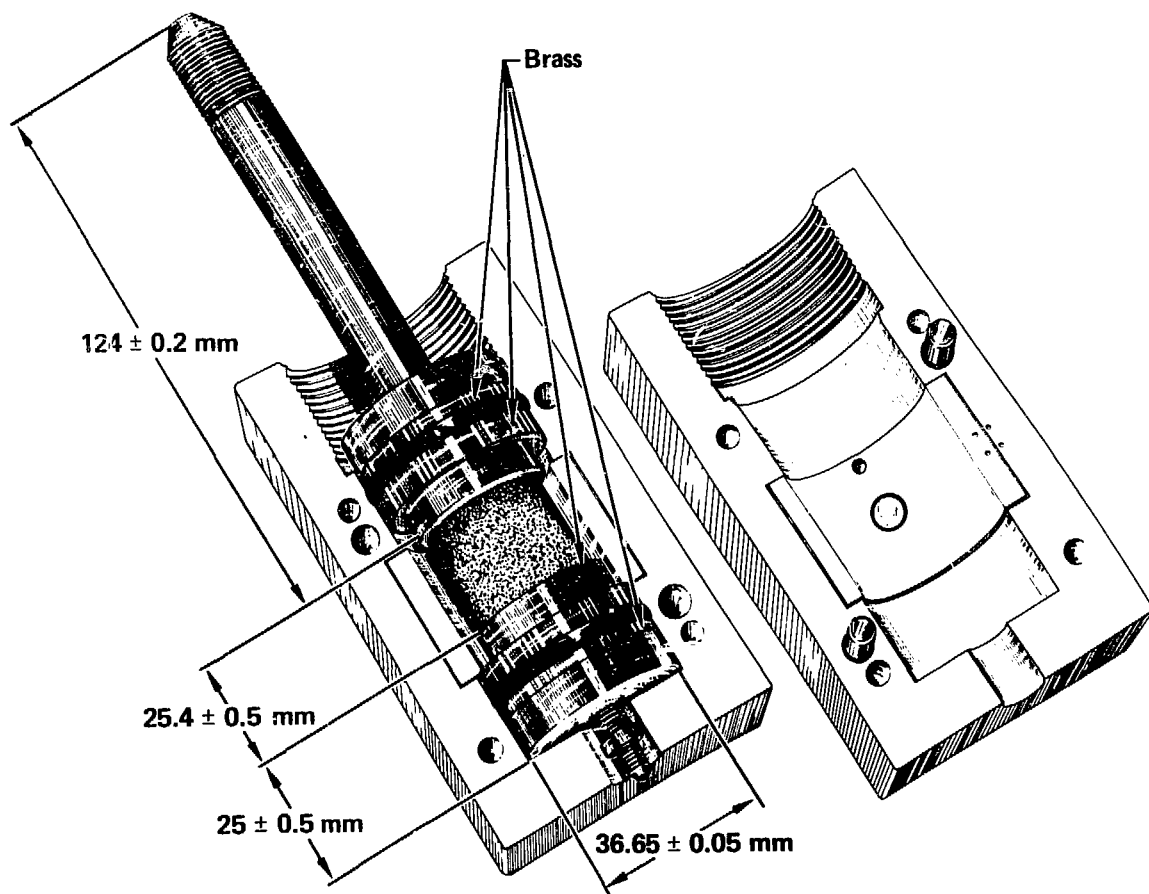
Teflon mold; sample and end fittings before injection of Halthane 73-18.
